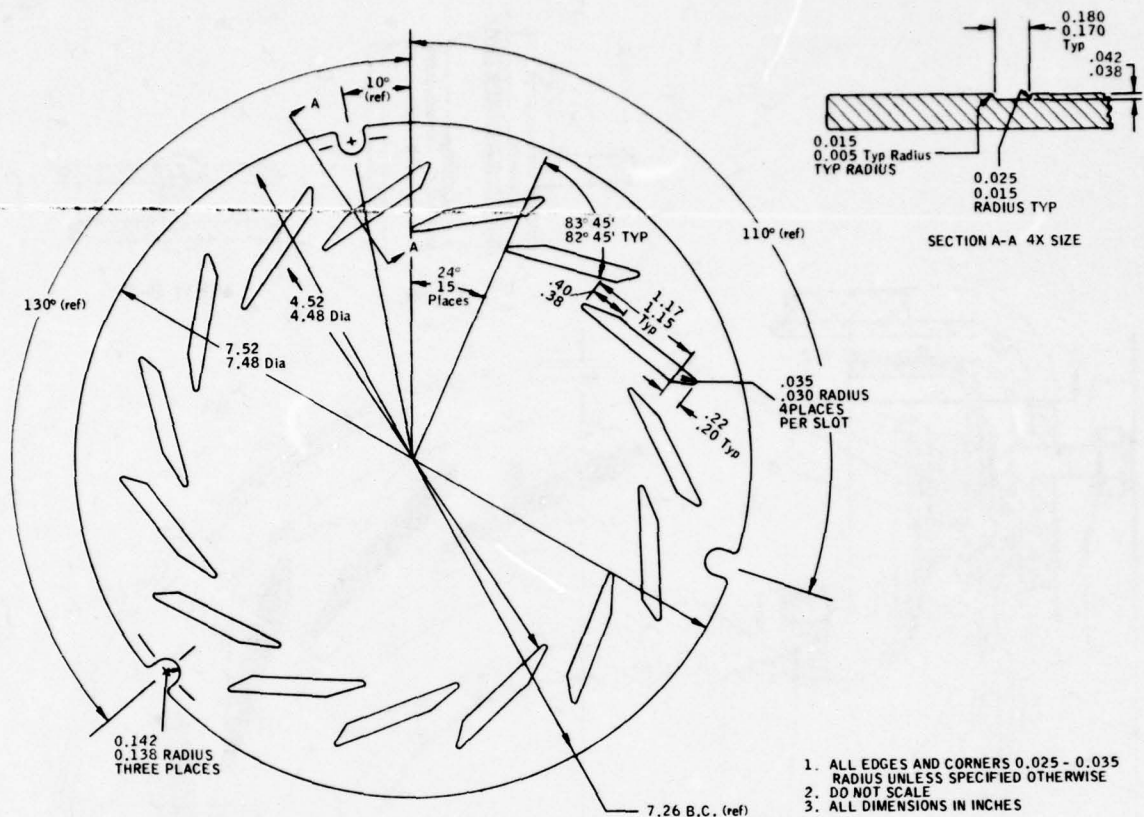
Aft Shroud Rings (RBSi₃N₄) to be Used in All-Ceramic Nozzle Rig Tests
